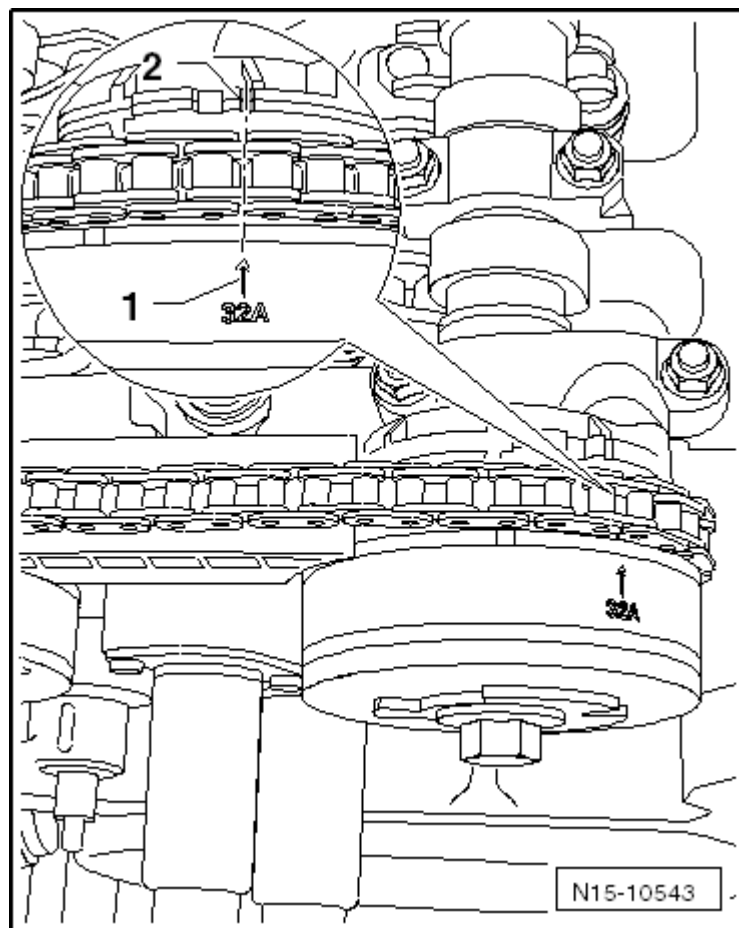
Identifying Arrow On Camshaft Adjuster Aligns With Notch On Right Side Of Control Housing
